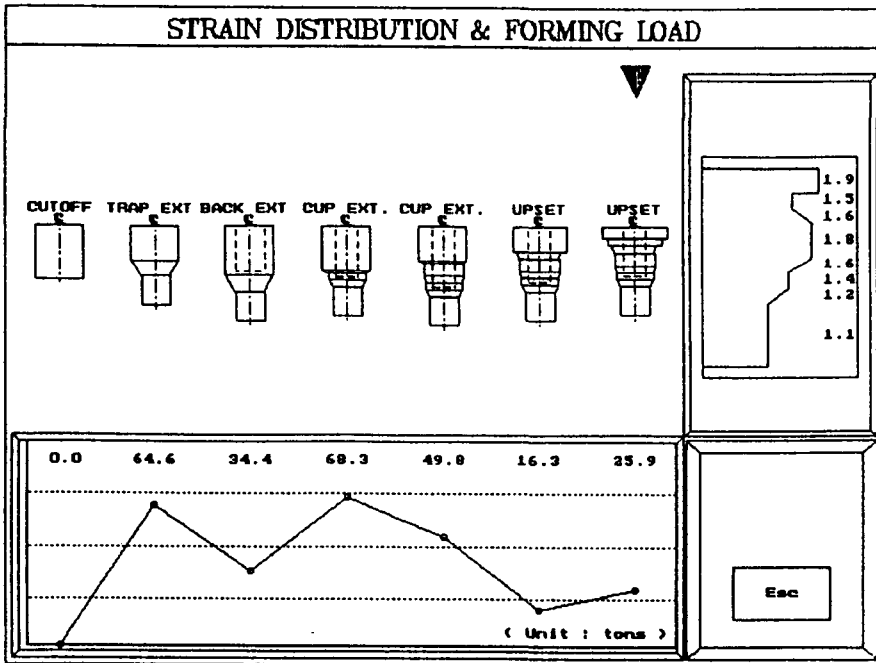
Designed sequence for the hollow part when hole can not be forged by one step backward extrusion (billet diameter = 13.58 mm, AISI 1010)
